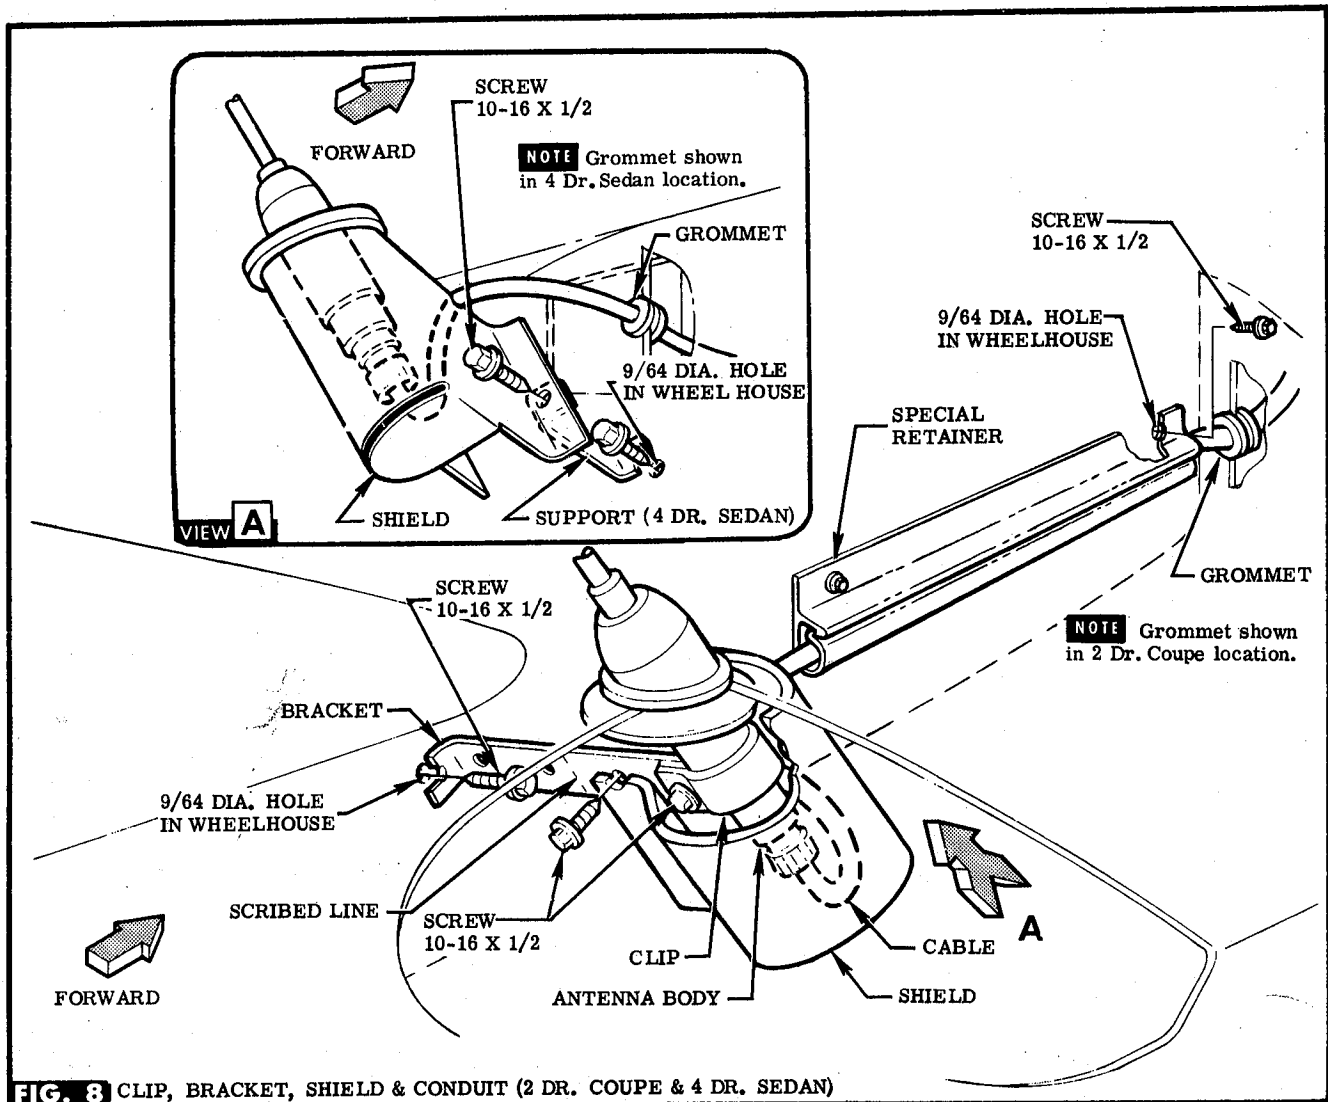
CLIP, BRACKET, SHIELD & CONDUIT (2 DR. COUPE & 4 DR. SEDAN)
